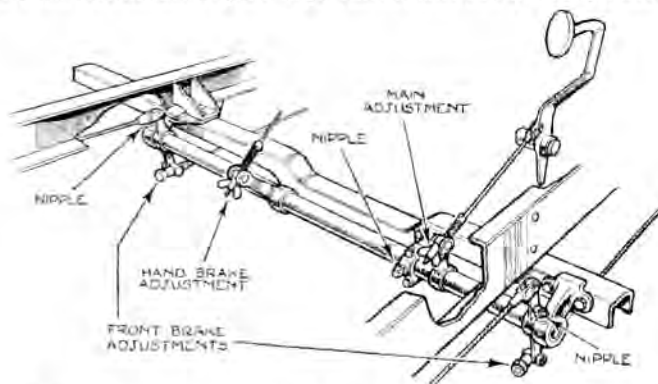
SHOWING THE BRAKE ADJUSTMENT ON THE CROSS-SHAFT AND THE LUBRICATION POINTS
